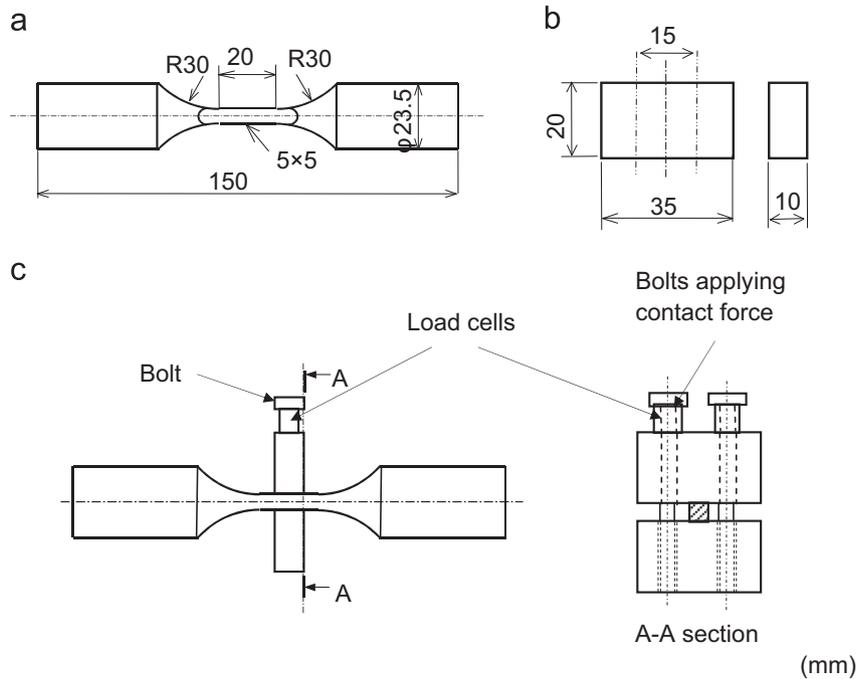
Shapes of specimens and test apparatus: (a) specimen, (b) contact pad, and (c) test apparatus.
